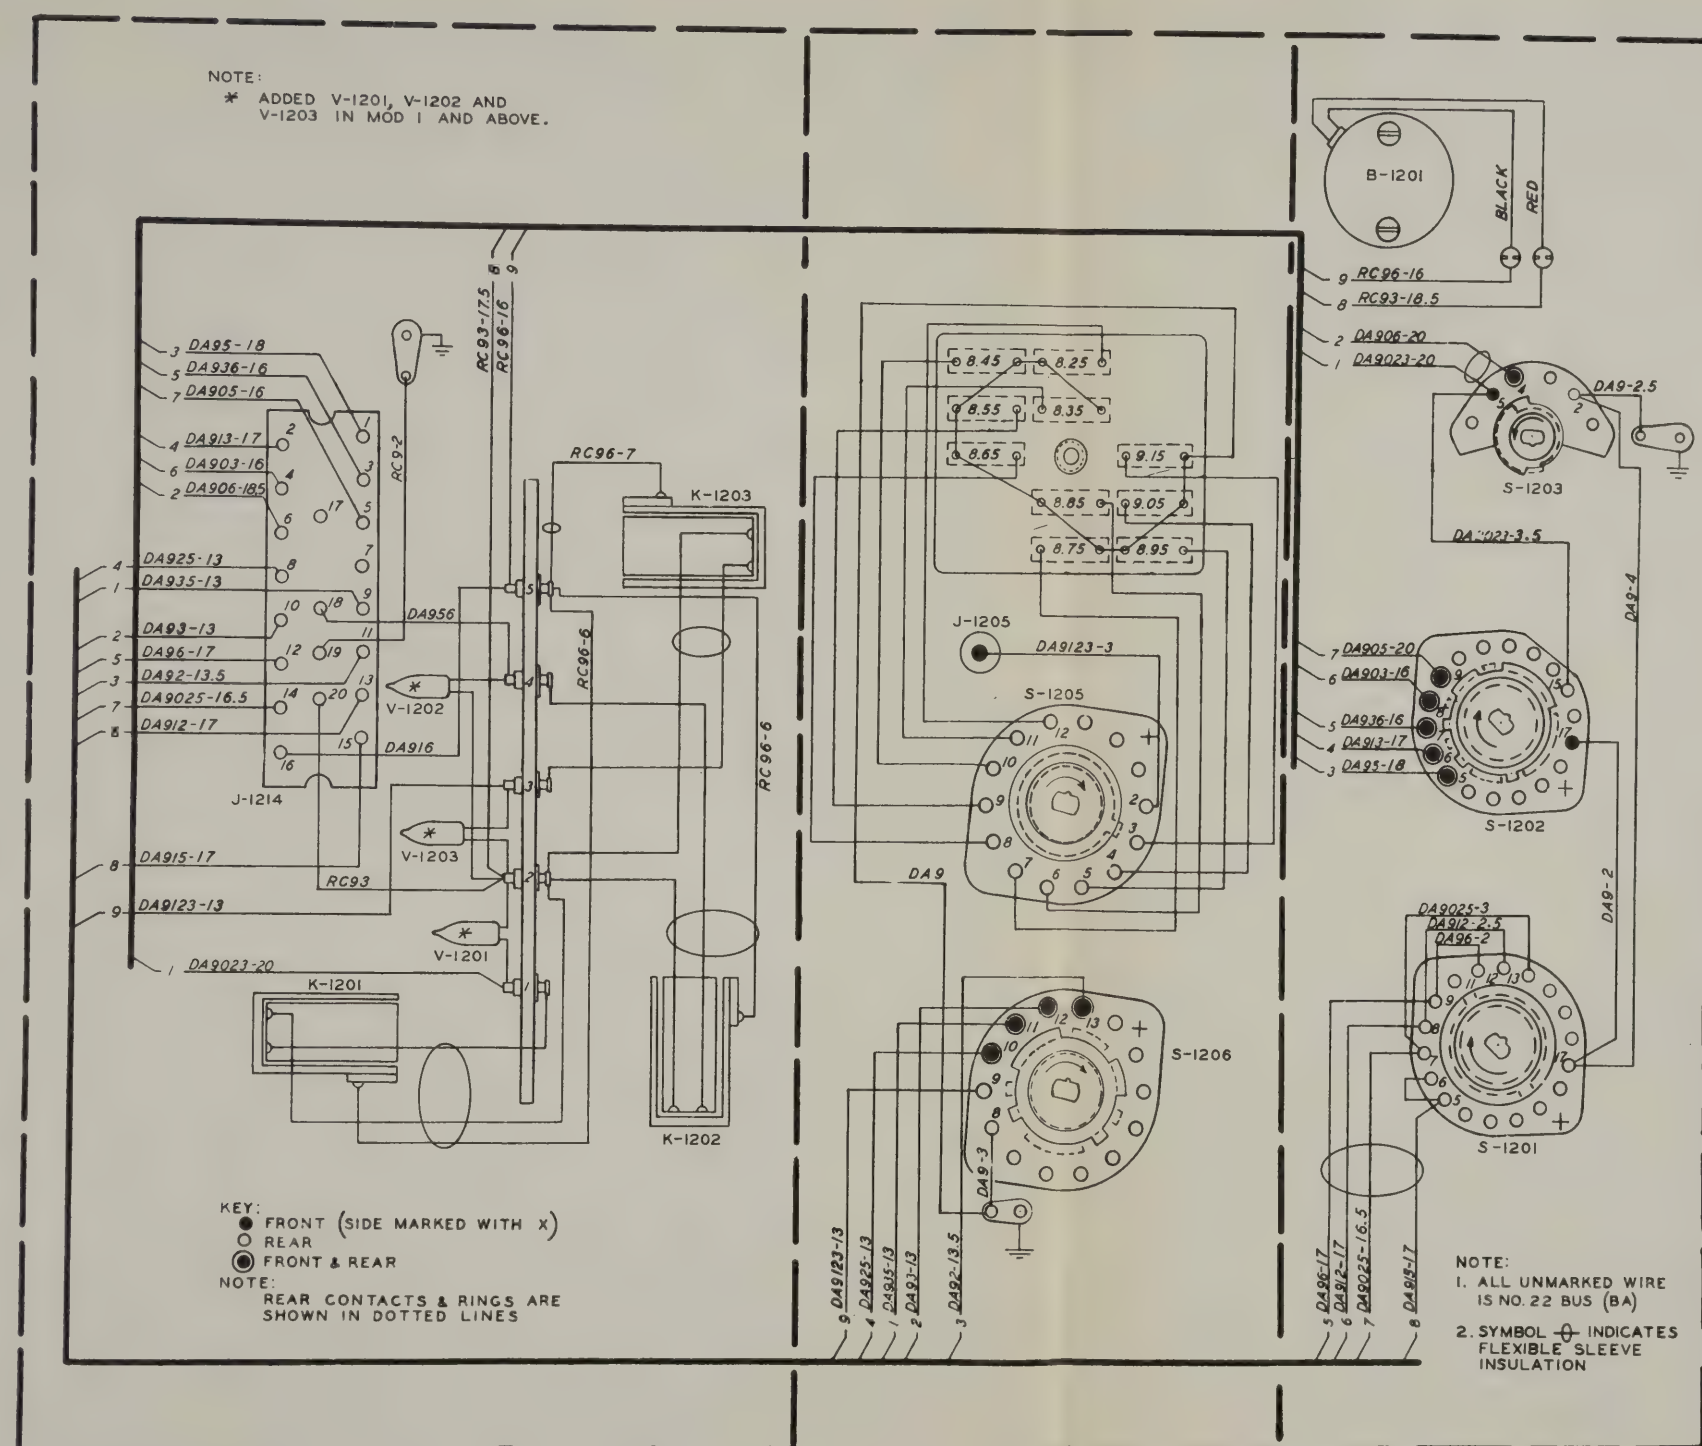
Receiver-Transmitter RT-178/ARC-27, Mechanical Tuning Drive Subassembly Practical Wiring Diagram, (Original and Mod. 1)
